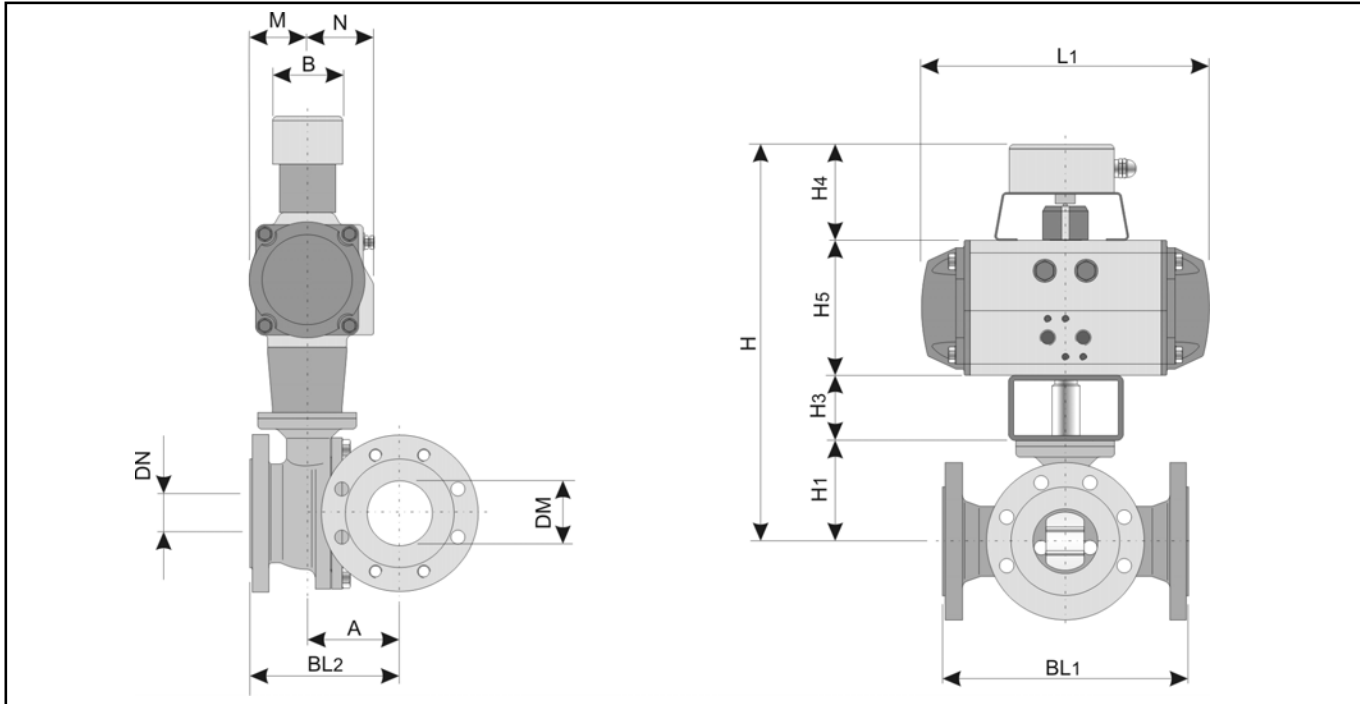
Dimensional drawing, metering valve with AT-quarter-turn actuator series 31a
